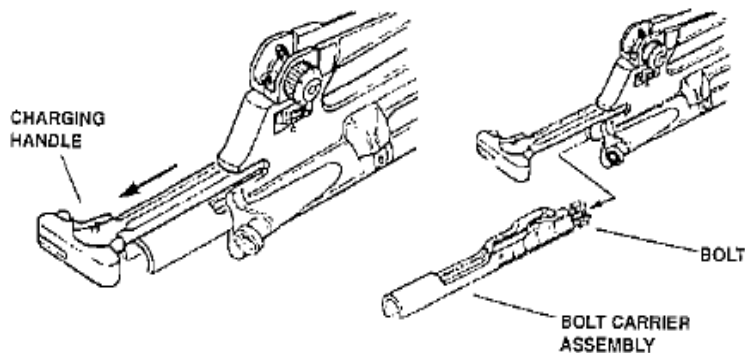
REMOVE BOLT CARRIER ASSEMBLY
